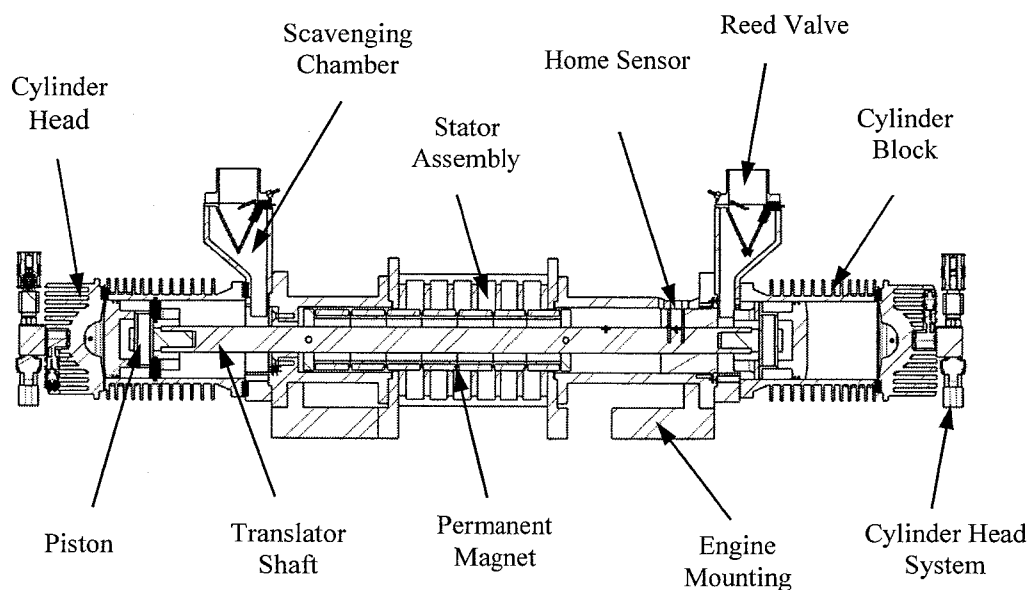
Cross-sectional view of UTP Free Piston Linear Generator Engine
